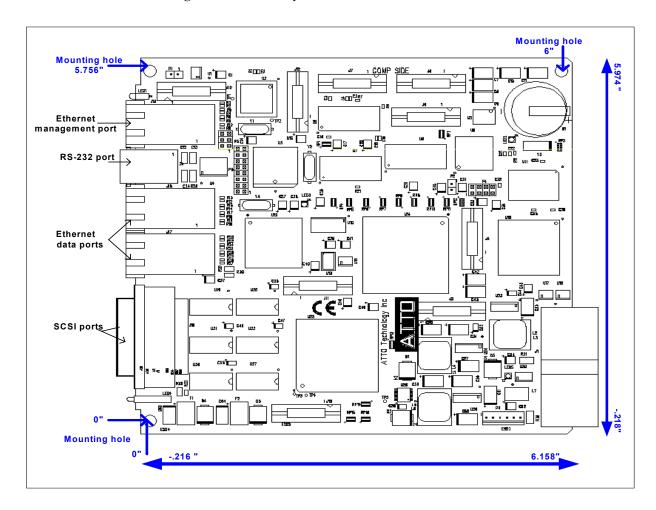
ATTO iPBridge 2500C board layout
